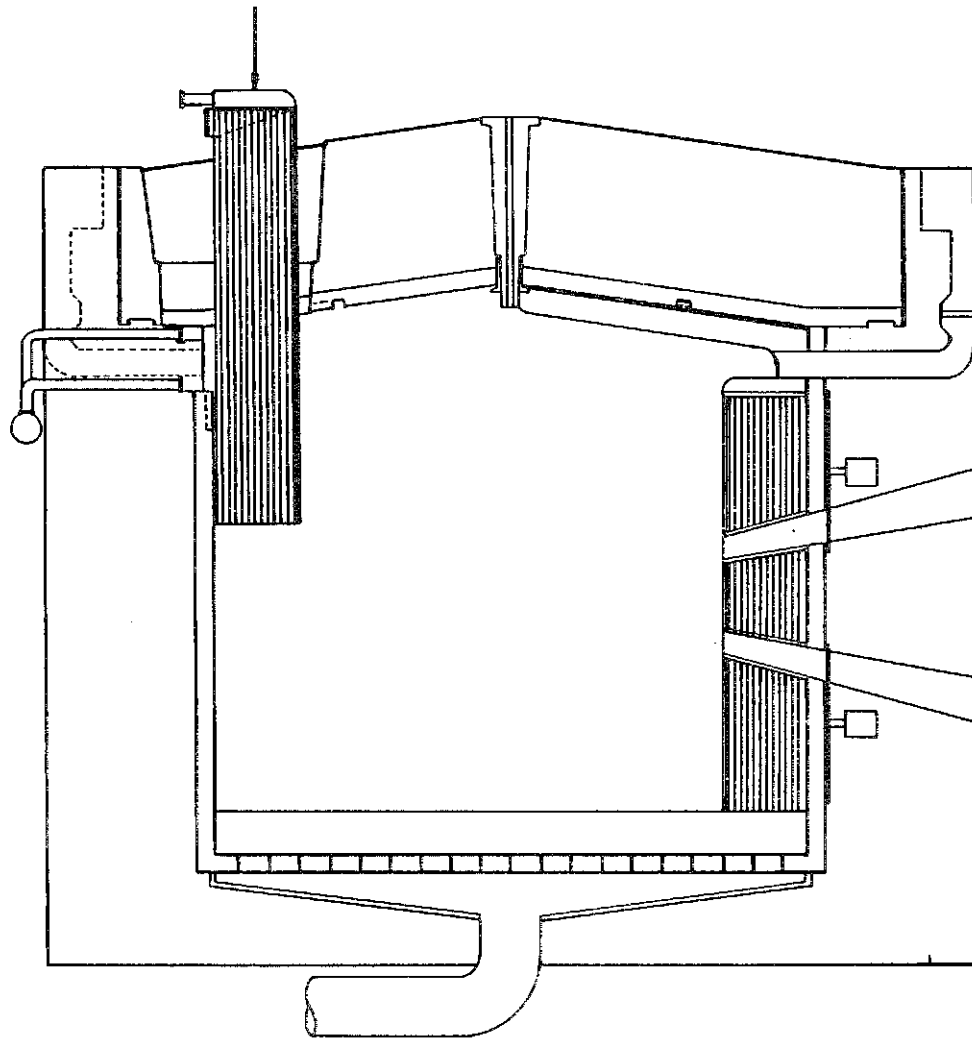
Cross section showing removal of a radial blanket module.
